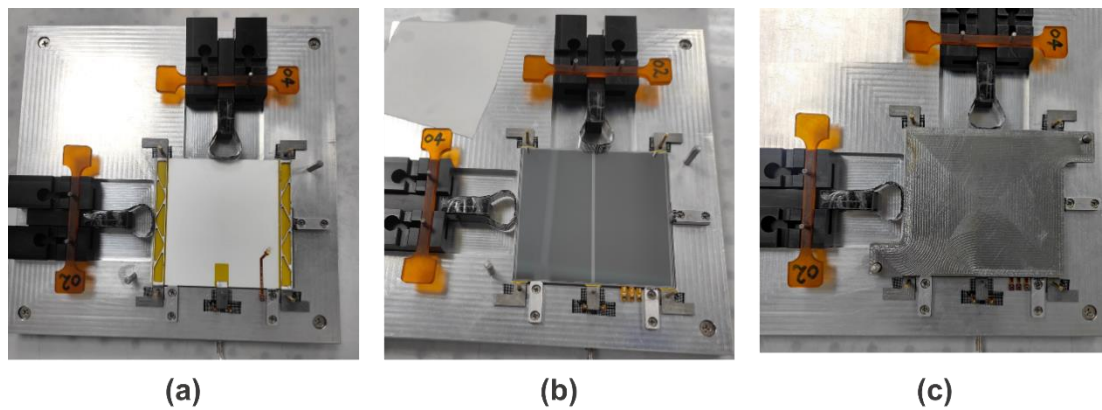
Bare module assembly steps. (a) Placement of bottom sensor, glue application, and bridge placement. (b) Placement of top sensor. (c) Application of weight plate for glue joint.
